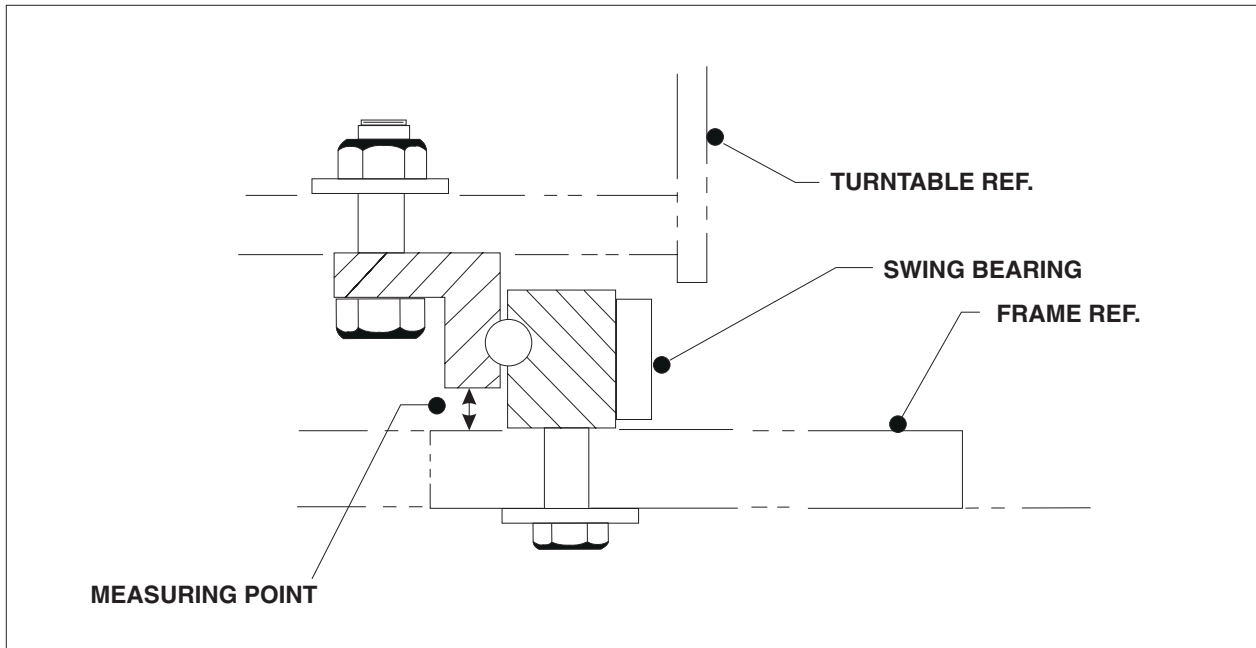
Swing Bearing Tolerance Measuring Point
